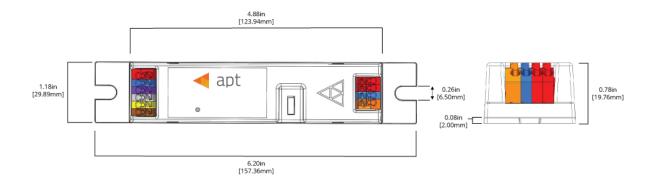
APT-CV2-Vx-LN Mechanical Drawing
